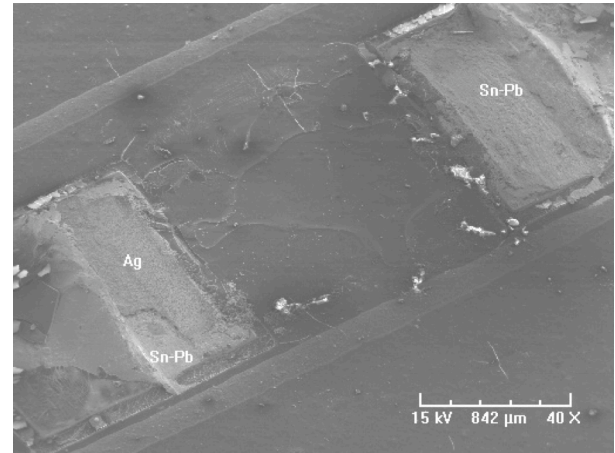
Fracture Surface of SnPb Solder Joint after Thermal Shock
